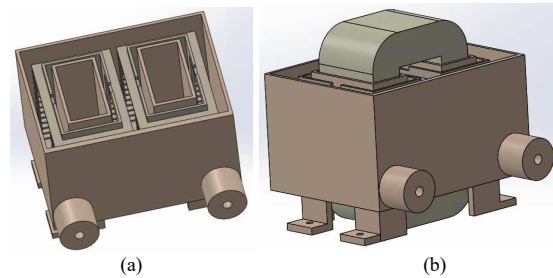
Assembly of (a) the winding case and two bobbins, and (b) the winding case, bobbins, and the core
